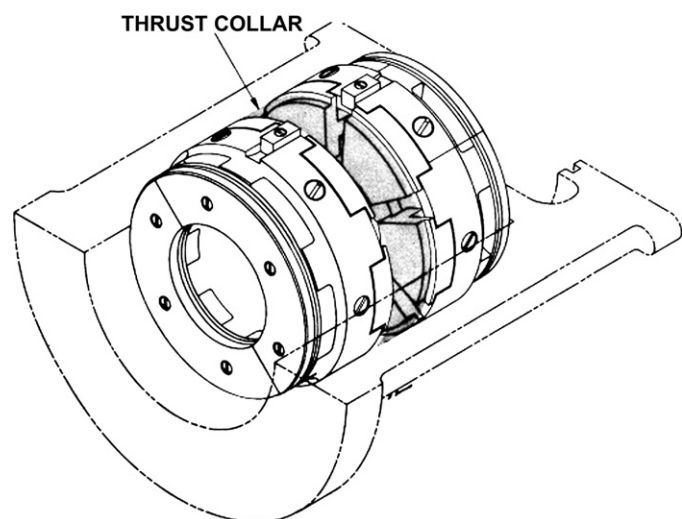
• Double acting self-equalizing thrust bearing assembly (thrust collar removed) (Courtesy of Elliott Company)
